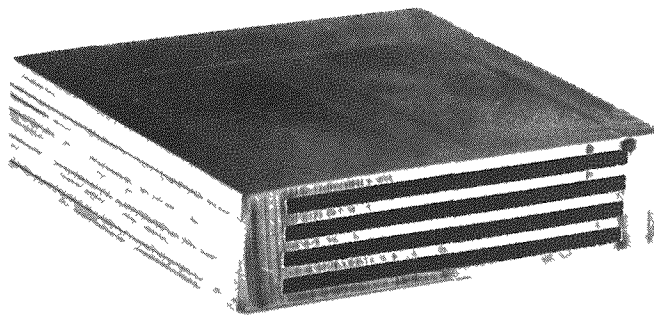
ASSEMBLY OF COMPONENTS FOR THE FLAT-PLATE STAINLESS STEEL-CLAD UO_2 ASSEMBLY
